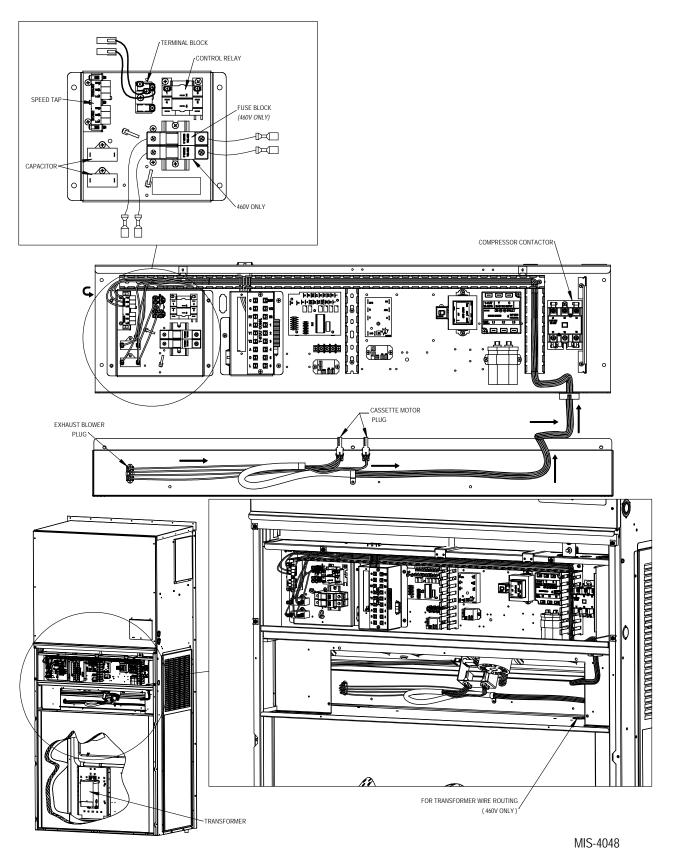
Transformer Mounting and Wire Routing (ERV-FC5 460V Only)
